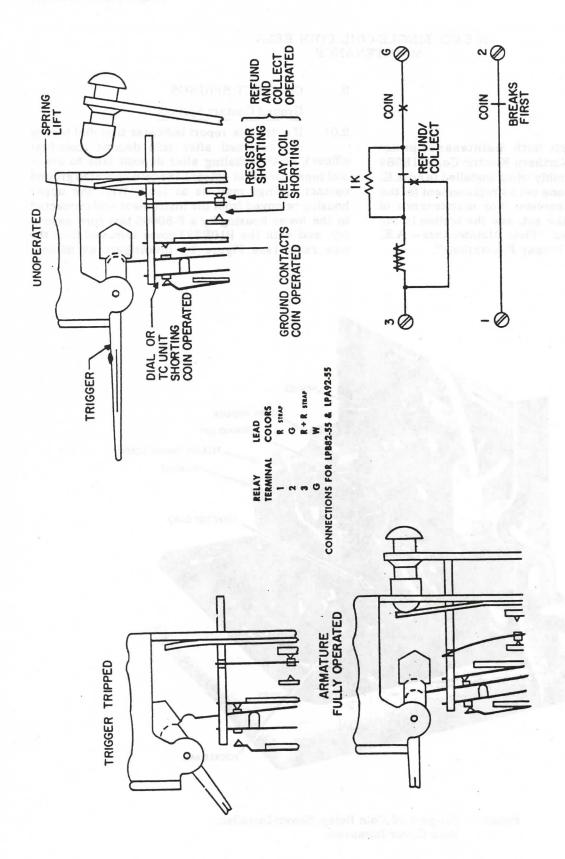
Coin Relay Contact Spring Assembly and Schematic.
